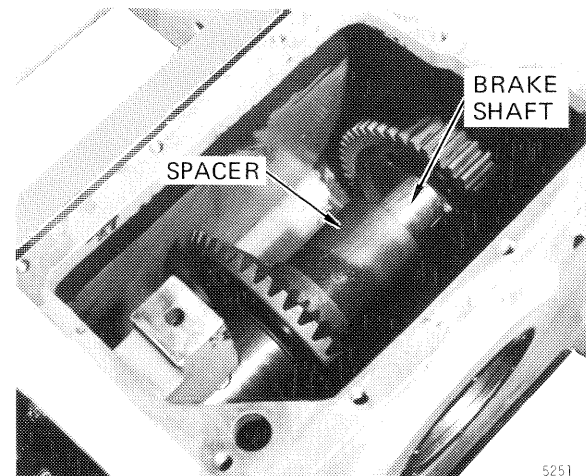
REASSEMBLY AND INSTALLATION OF CLUTCH SHAFT ASSEMBLY (Sheet 1 of 6)
